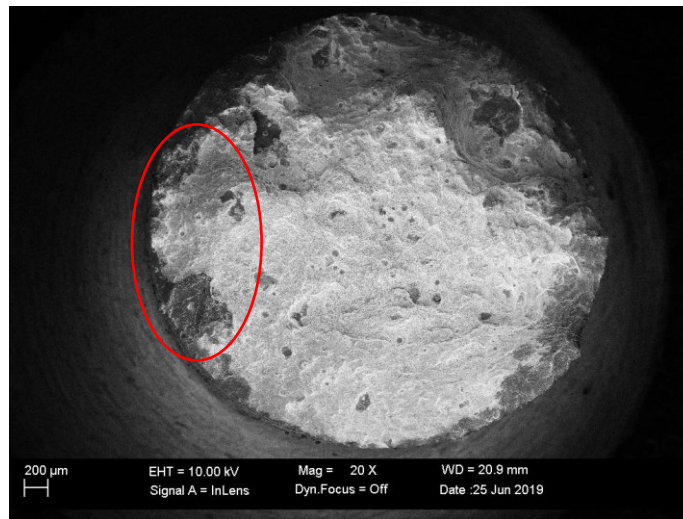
5 minute air cylinder #5 fracture surface
